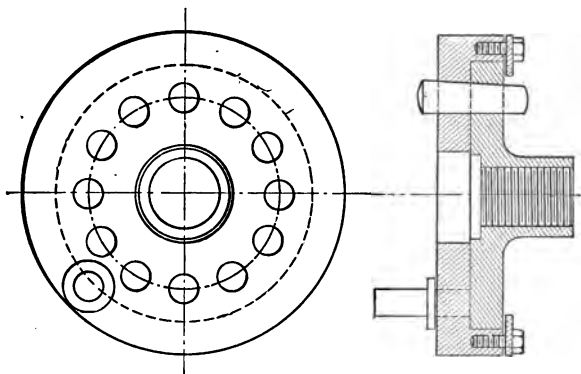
Face-Plate for Multiple Thread Cutting.
